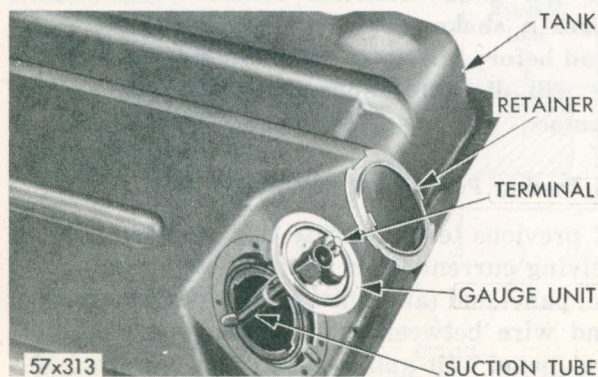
Removing and Installing Fuel Gauge (Tank Unit)
